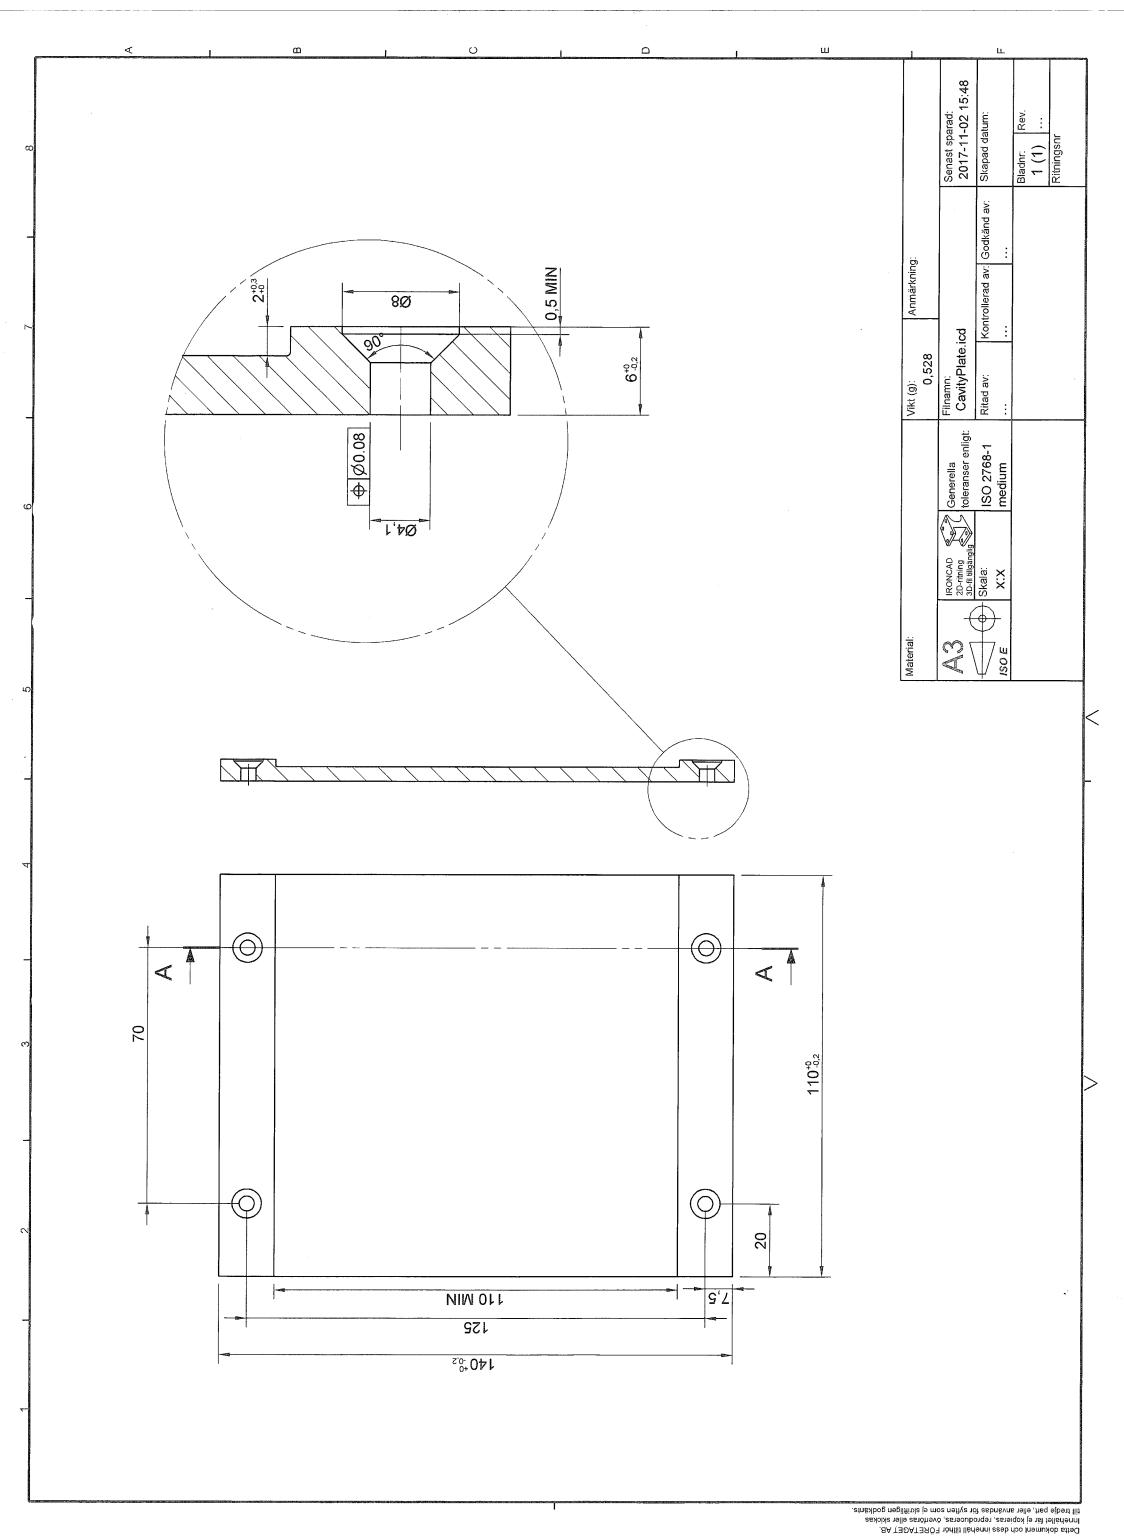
Technical drawing of the cavity insert. Distances are given in mm.
